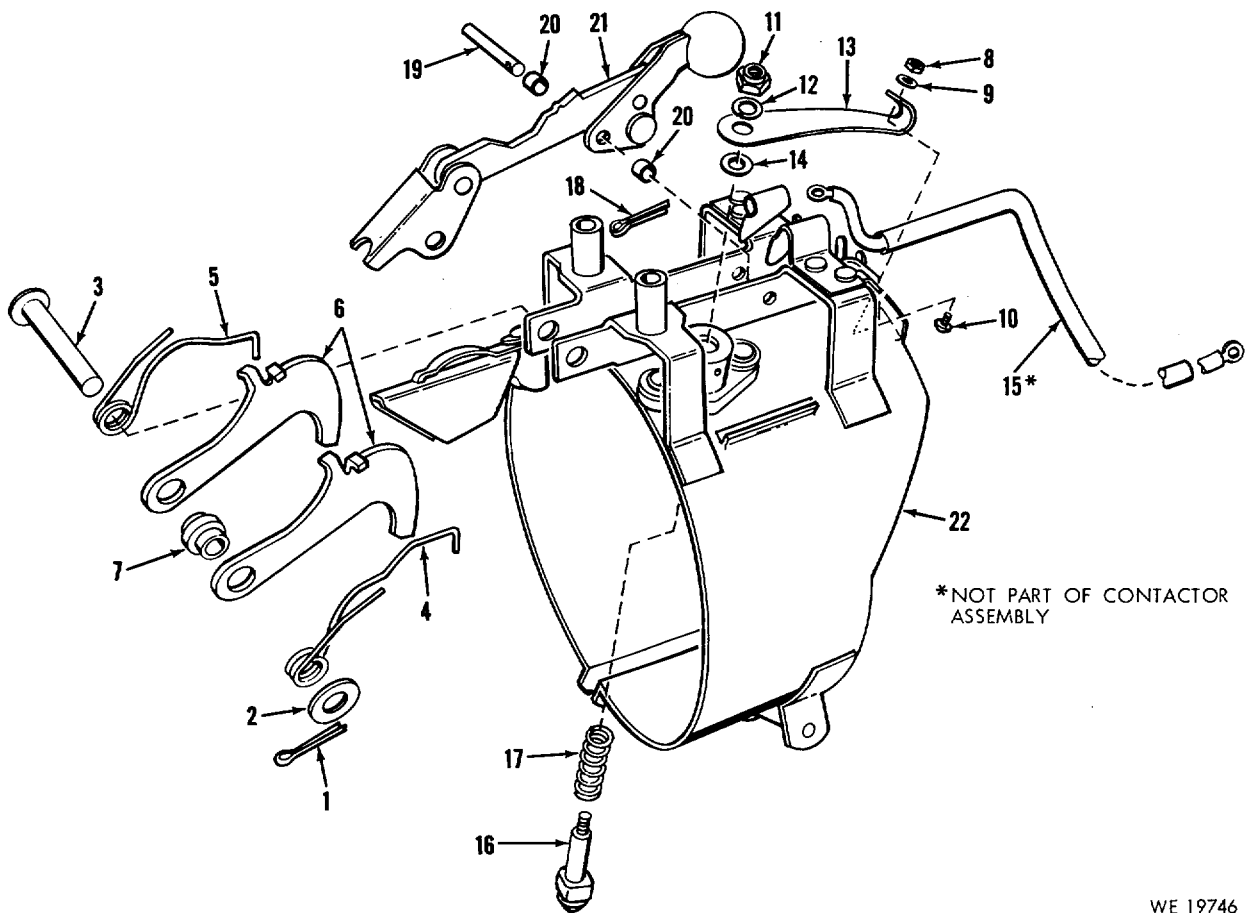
Contactor latch assembly 7162791 (M20A1 and M20A1B1)-exploded view.
